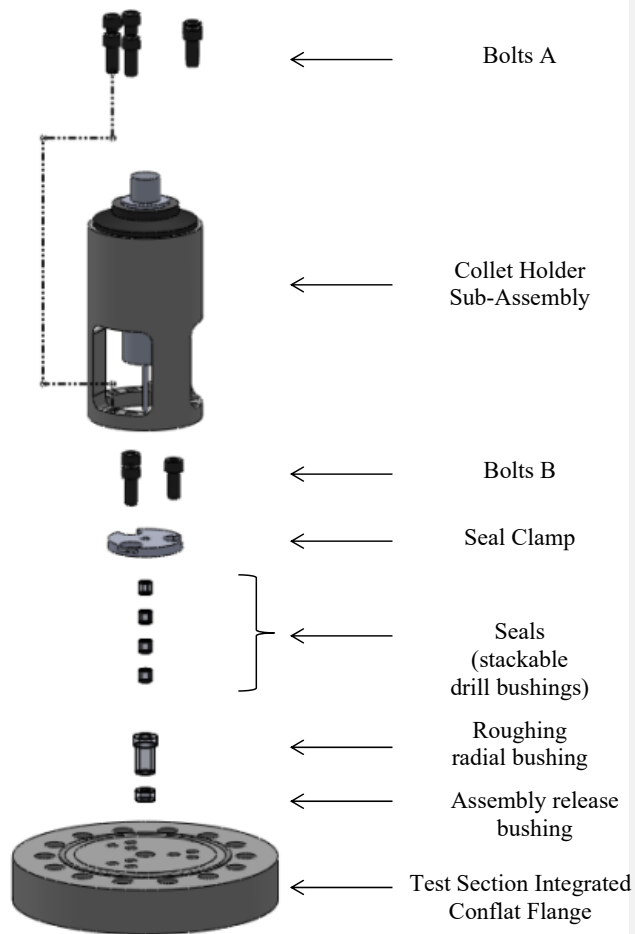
Assembly procedure of Shaft-Seal Sub-Assembly
